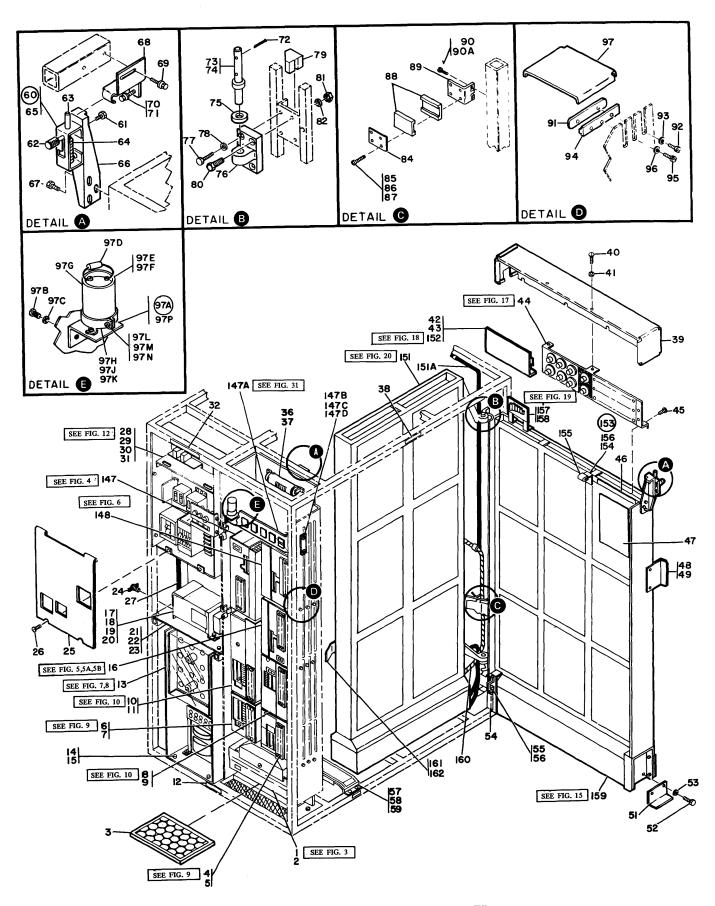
2314 FINAL ASSEMBLY. REAR VIEW.
